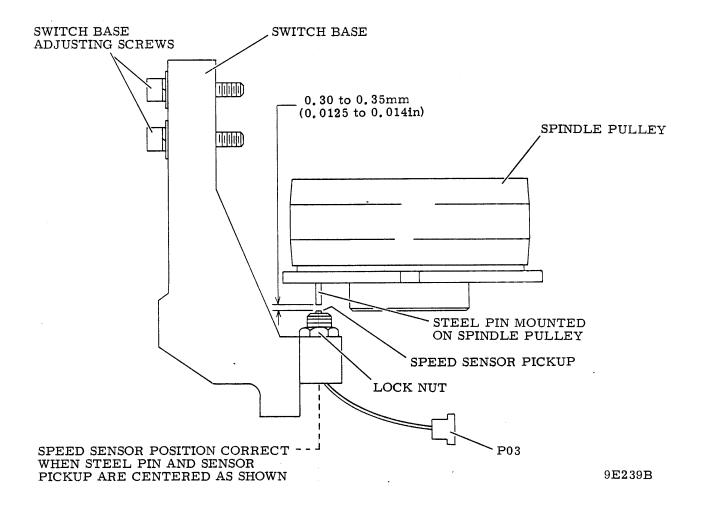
Speed Sensor Assembly Adjustment (S/C 09 and Above)
